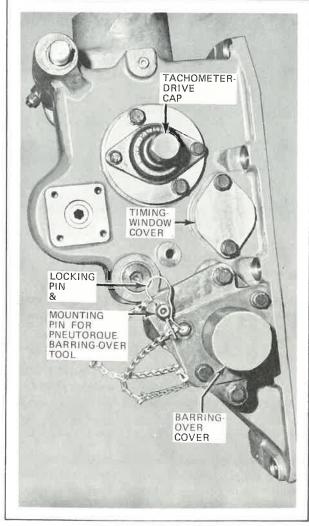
ASSEMBLED GOVERNOR DRIVE, FORWARD SIDE.
